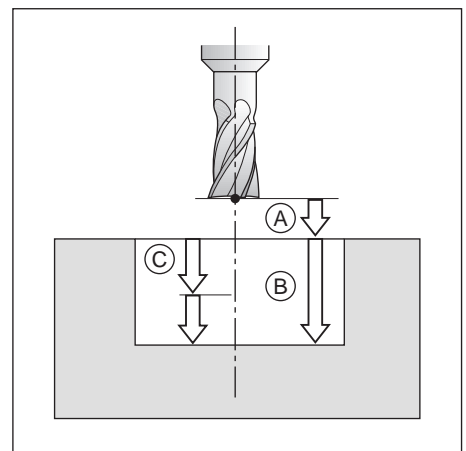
Distances and infeeds with CIRCULAR POCKET MILLING
